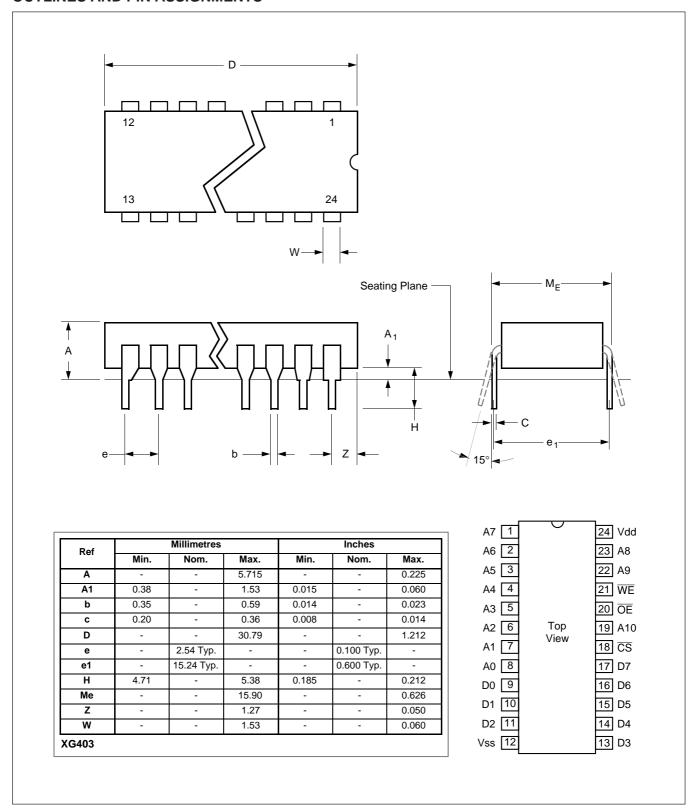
24-Lead Ceramic DIL (Solder Seal) - Package Style C
